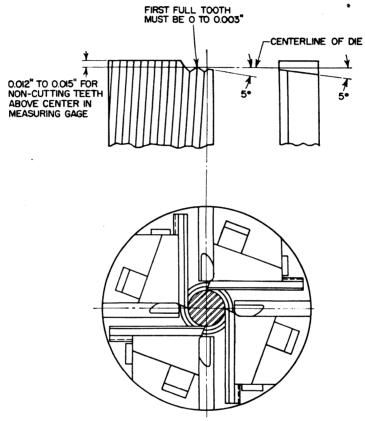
Chaser-type die for threading die castings. With a die of this type, approximately thirty thousand ¾-24 threading operations can be performed between grinds when working with zinc or aluminum parts.
